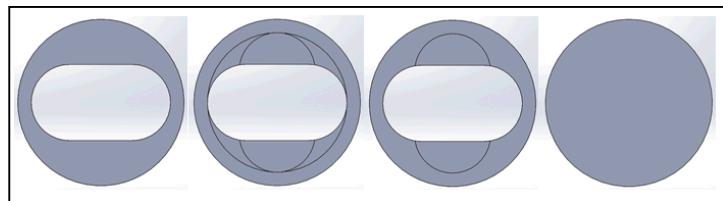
Layers in the reusable cap fastener from bottom (left) to top (right)
